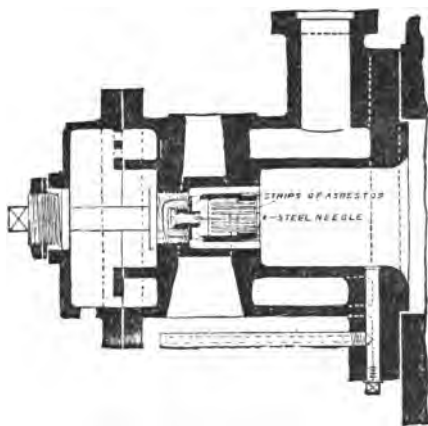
Section of Clayton and Shuttleworth's Oil Engine Igniter.
